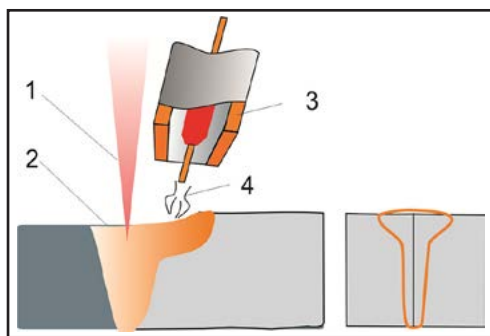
Hybrid welding process laser + electric arc
